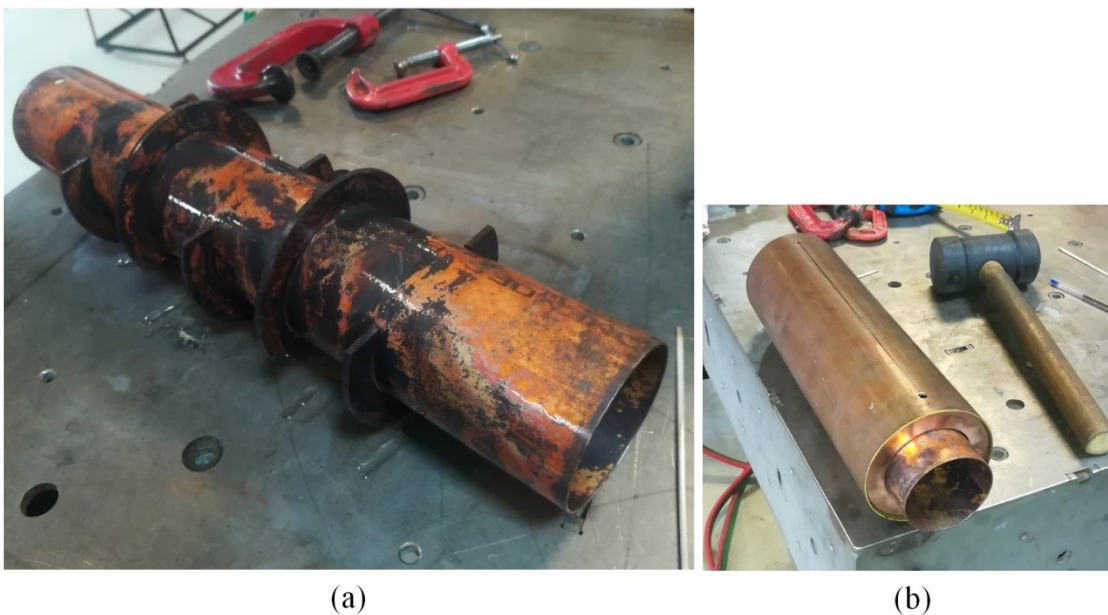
Water jacket fabrication: (a) after soldering the baffles and rinsing, (b) after mounting the external tube and caps.
